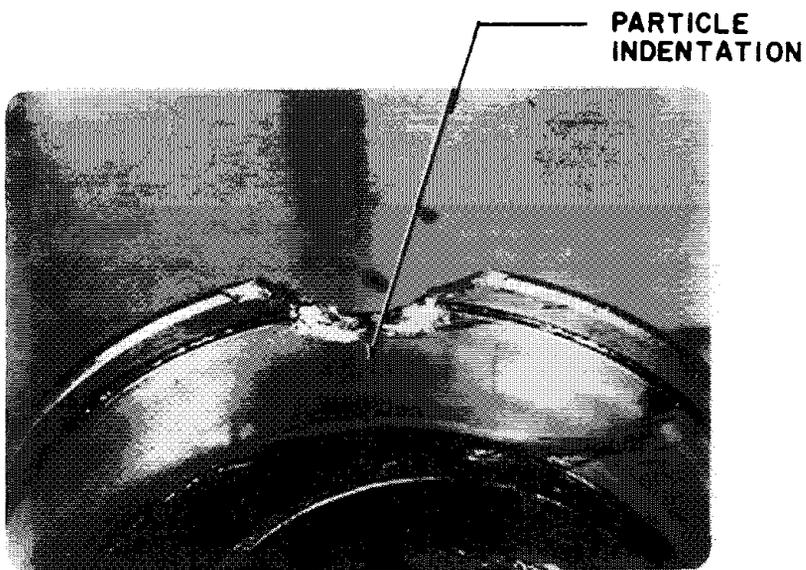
BEARING FP-10 AFTER 150.0 TEST HOURS SHOWING ROLLER WEAR AND "IMPRINTS" ON INBOARD END
